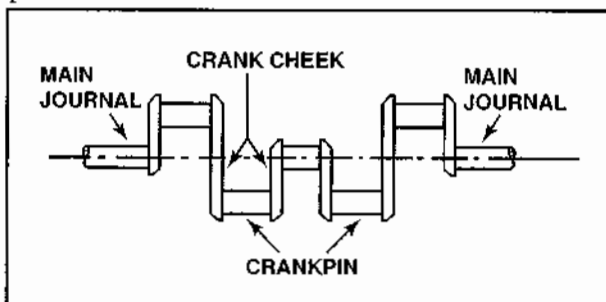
Every crankshaft has main bearing journals, one or more crankpins, and crank cheeks.
